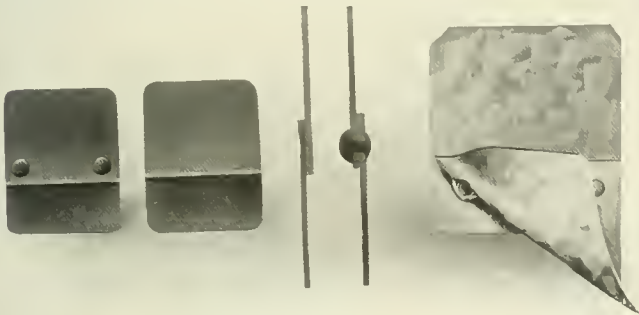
Both Sides of Spot-welded Piece—Spot Weld and Rivet Joint—Test of Spot Weld on Galvanized Iron
